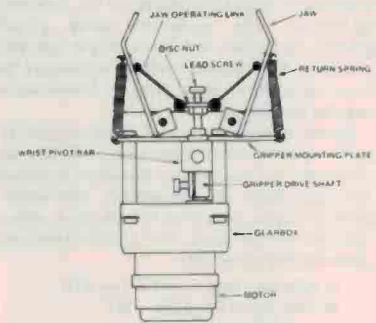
Side view of the gripper, showing how the lead screw, driven by the motor, operates the gripper jaws.
